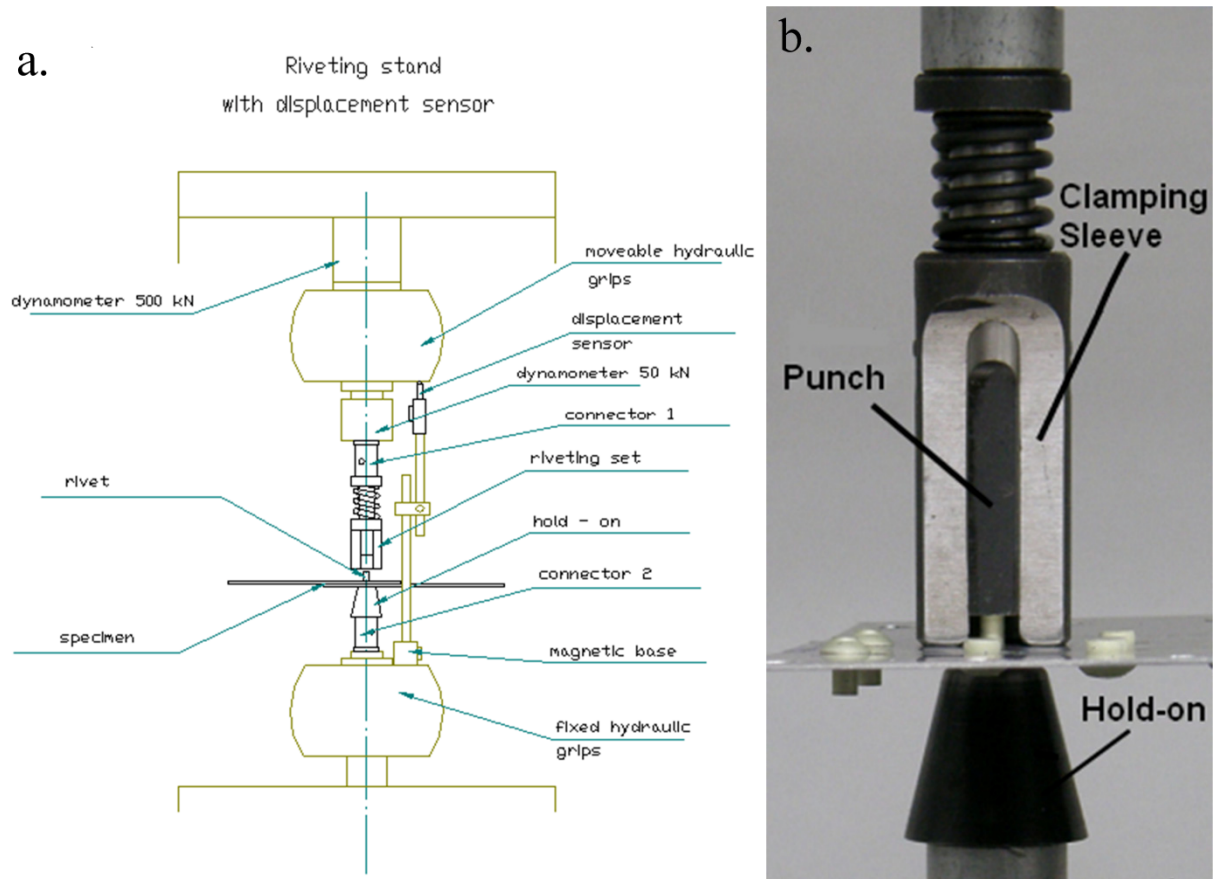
Riveting stand on testing machine. a) scheme of the stand [2] b) riveting set (on the basis of [3])
